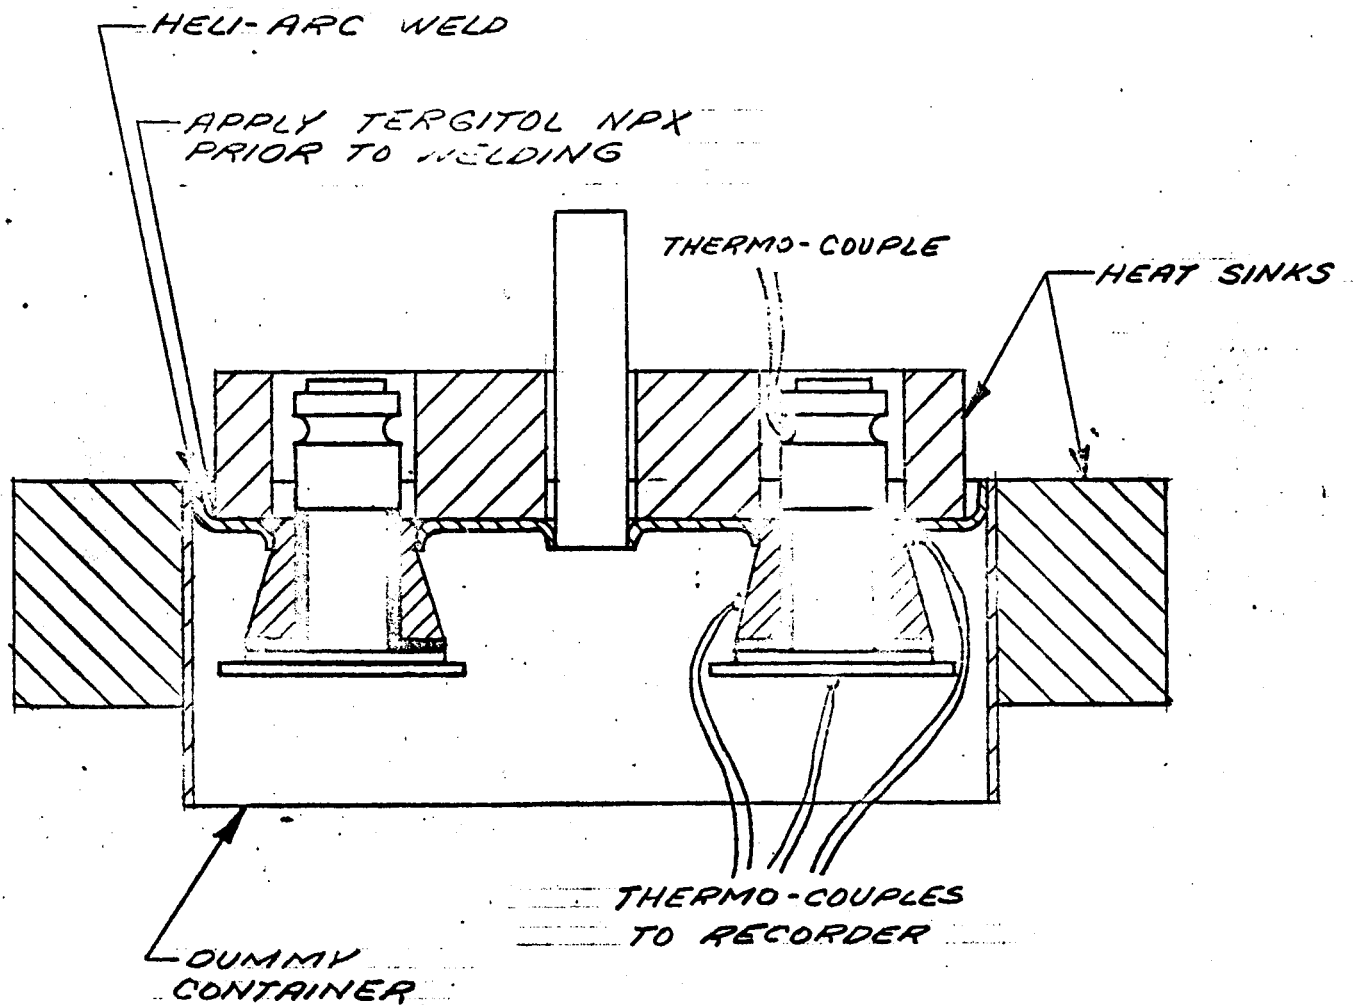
B HEADER WELDING INVESTIGATION
